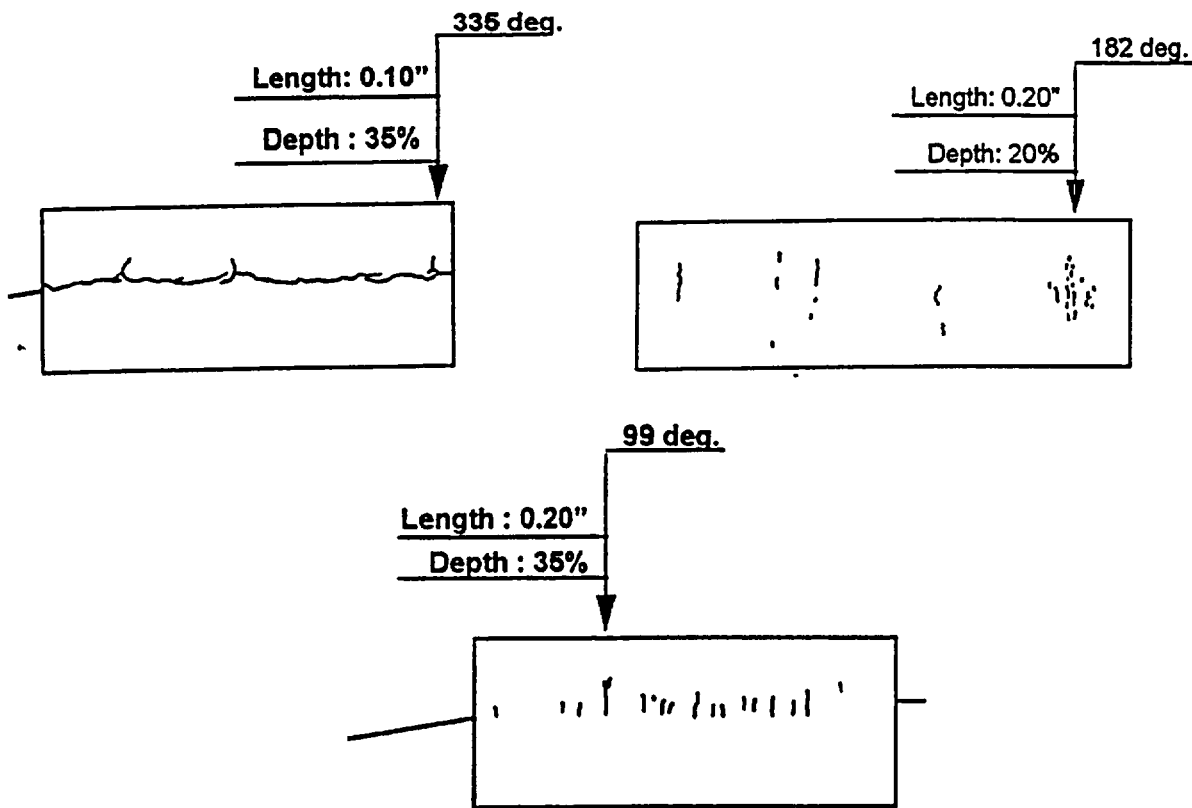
Sketch of dye penetrant images of three ODSCCs in mock-up. Test section axis is vertical. Top-left SCC is circumferential; top-right and bottom sketches show numerous LODSCCs distributed around the circumference. Bottom sketch shows a series of LODSCCs at the roll transition.
